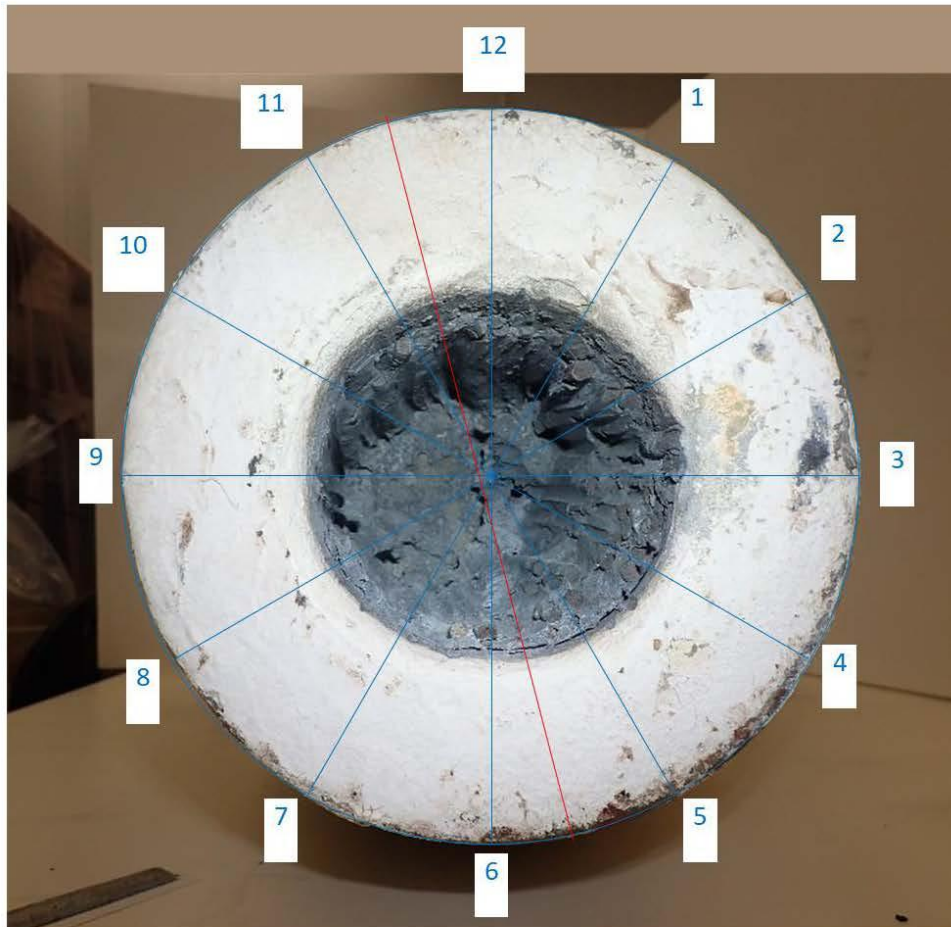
Photo of the socket base with the top of the socket at the top of this image. The 12 o'clock position around the socket base is associated with the top of the socket. The 3 o'clock is associated with the right side of the socket, as if viewing the socket from the feed platform, facing towards the tower. The red line identifies the intended plane for the initial longitudinal cut of the socket cone. Note that the cut was intended to be slightly off center, to attempt to avoid any visually identifiable fracture surfaces. Unfortunately, the fracture surface of wire R was partially cut.
